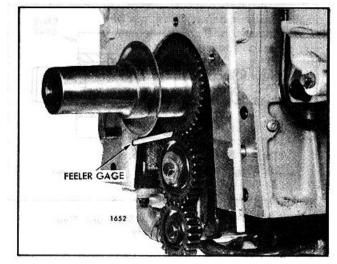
Measuring the Clearance Between the Teeth of the Oil Pump Driven Gears.
